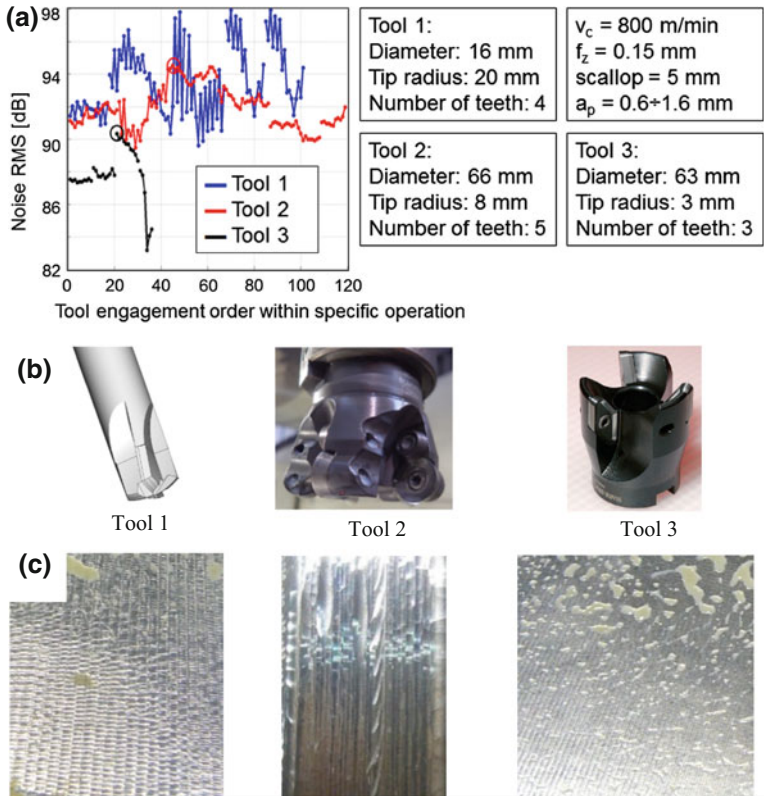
The tested tools for finishing operation: (a) comparison of noise RMS values; (b) tool geometries; (c) final workpiece surfaces
